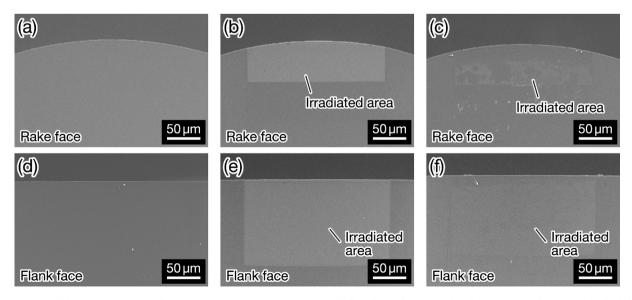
SEM images of the diamond tool used for the experiments showing (a) rake and (d) flank faces of a non-irradiated diamond tool, (b) rake and (e) flank faces of a diamond tool irradiated with Ga ions at a dose of 10 μ C/cm², and (c) rake and (f) flank faces of a diamond tool irradiated with Ga ions at a dose of 10 μ C/cm² and then heat treated.
